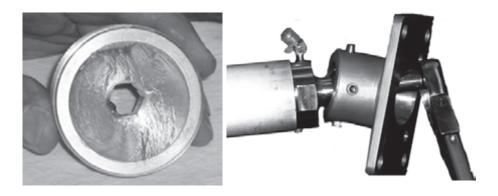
Use a 1/2"hex bit socket to tighten the large retaining nut.
